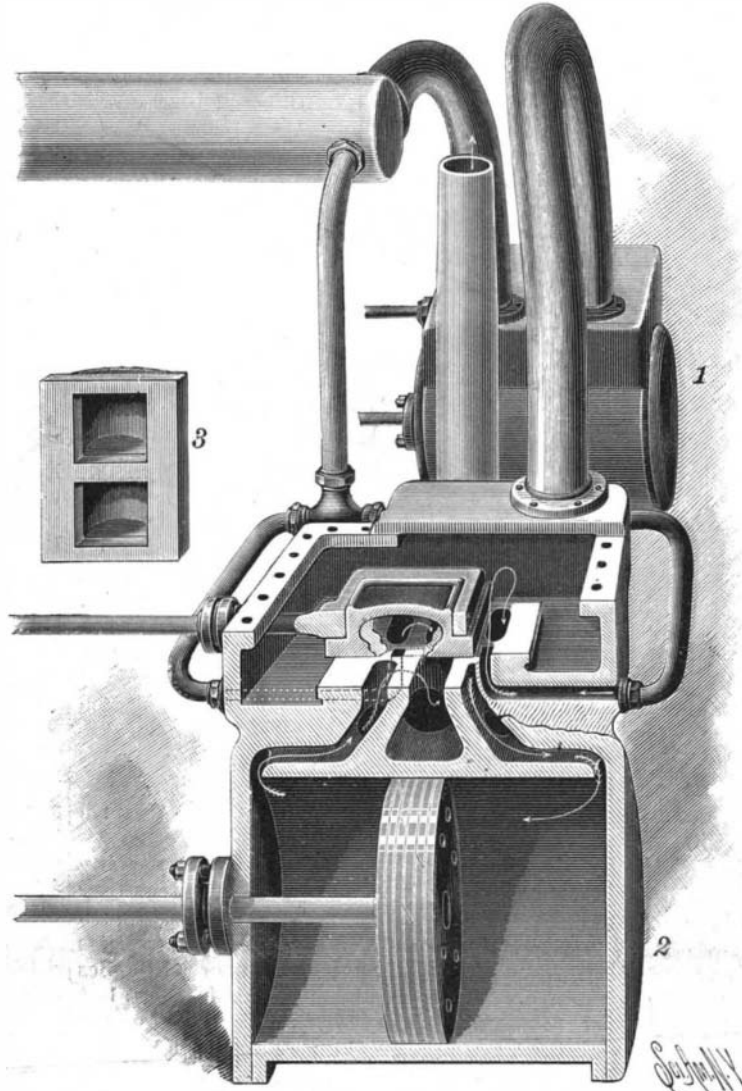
LONGITUDINAL SECTION THROUGH VALVE CHEST AND PORTS, LOW PRESSURE CYLINDER.
